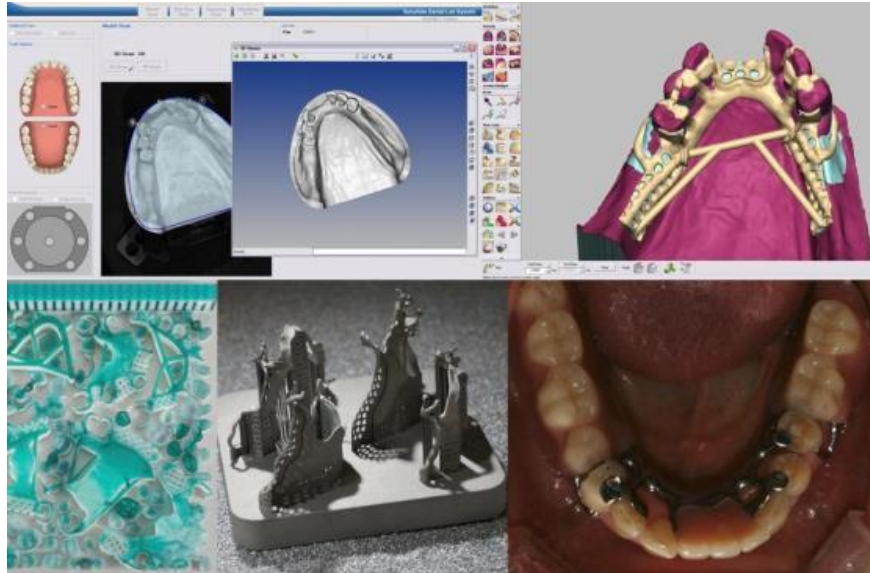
Metal framework for removable partial denture is designed virtually and printed by additive manufacturing technology
